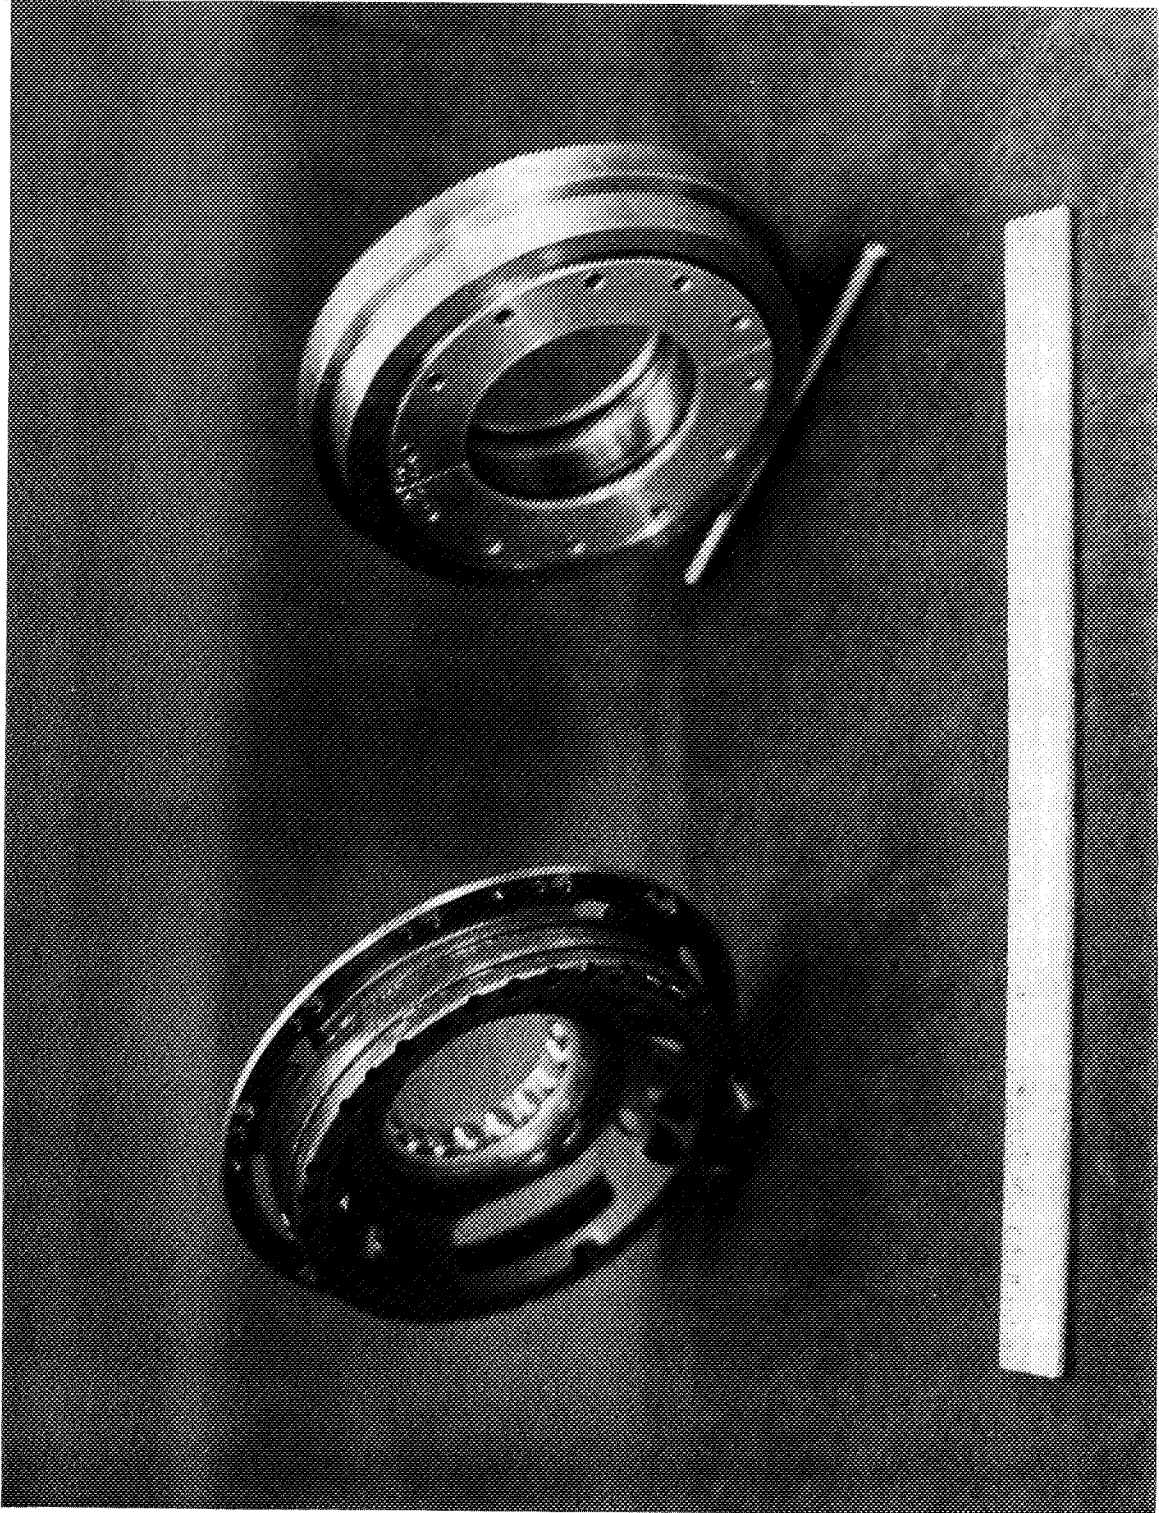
Production T55 Roller Bearing Support and the Replacement Elastomer Damper
